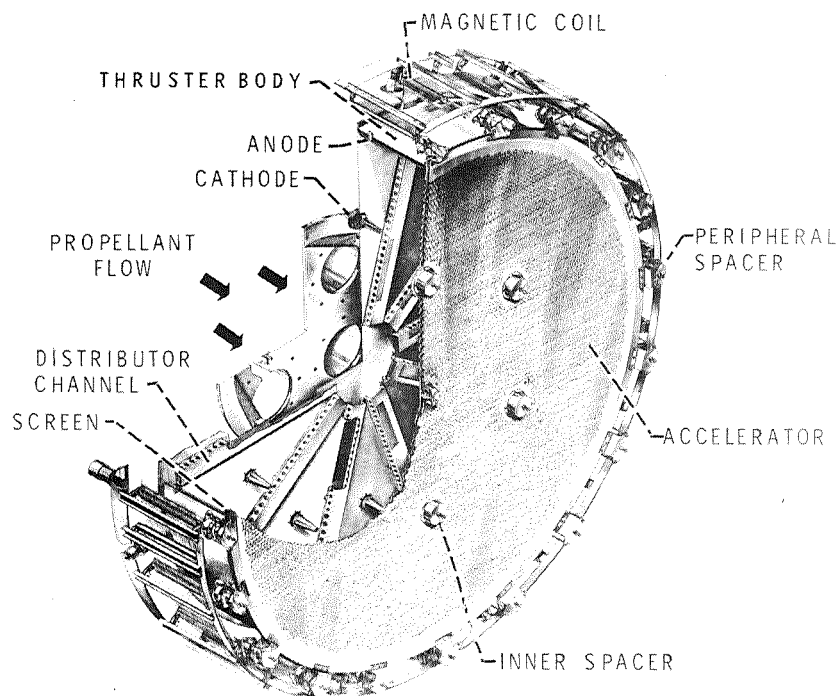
Cutaway view of 1.5 meter diameter Kaufman thruster.
